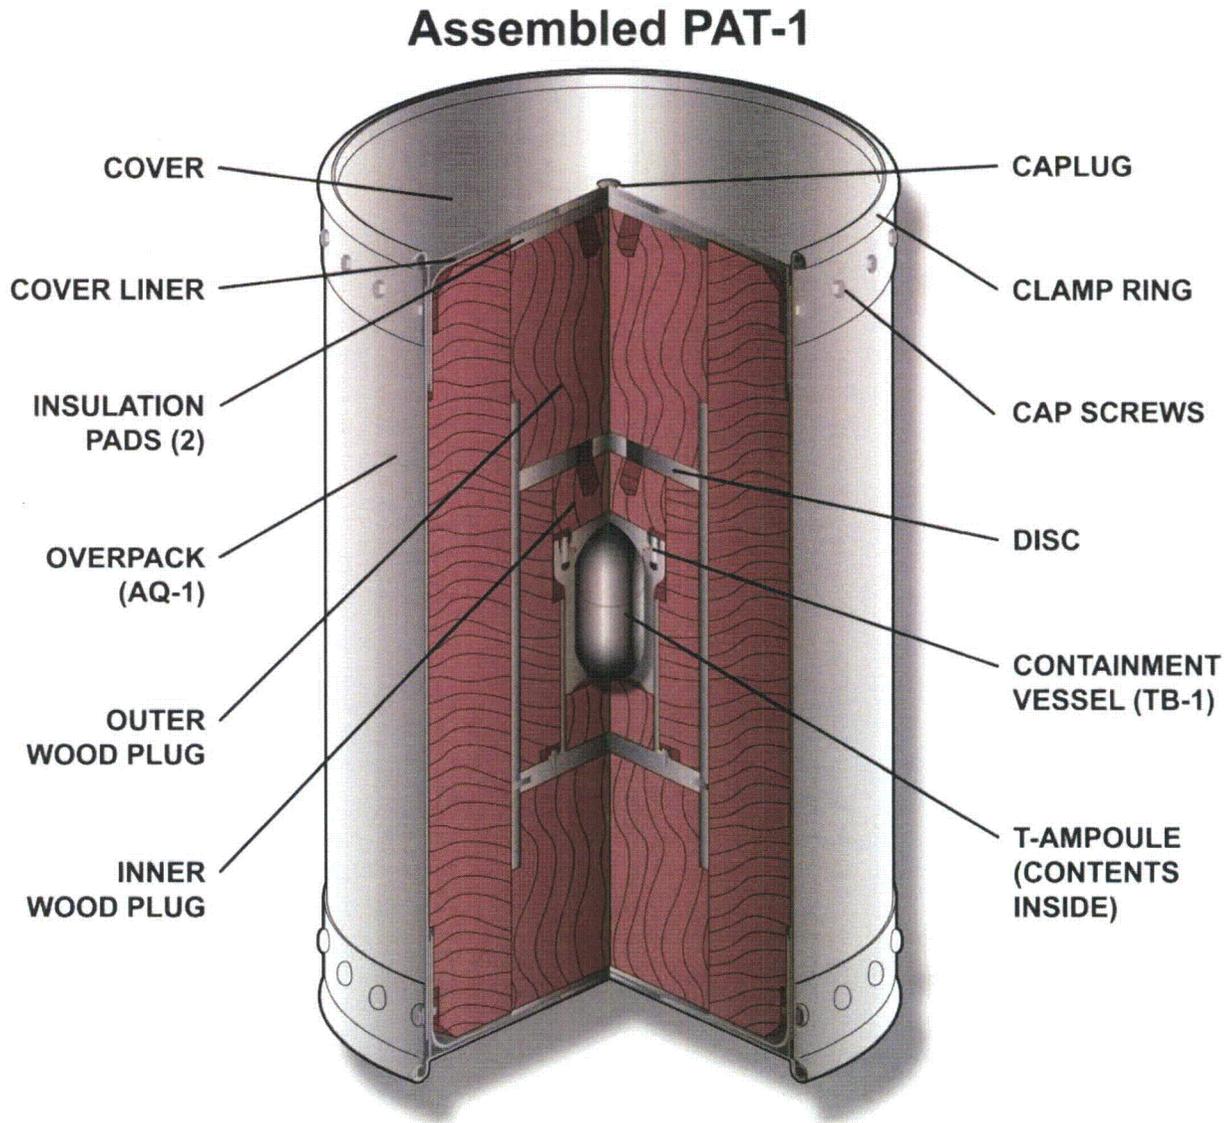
Assembled PAT-1 Showing AQ-1, TB-1, and T-Ampoule
